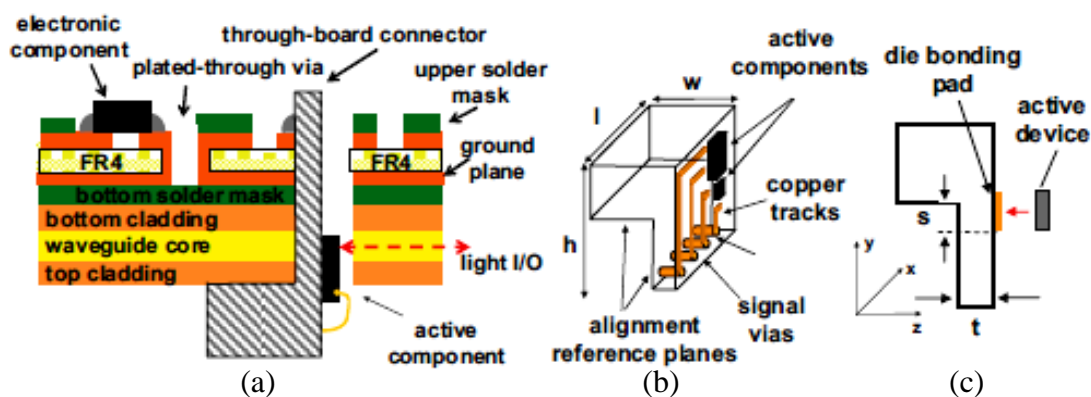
Illustration of a butt-coupled scheme employing an L-shaped connector: (a) cross section of an OE PCB with L-shaped connector, (b) and (c) schematics of the L-shaped connector [113].
